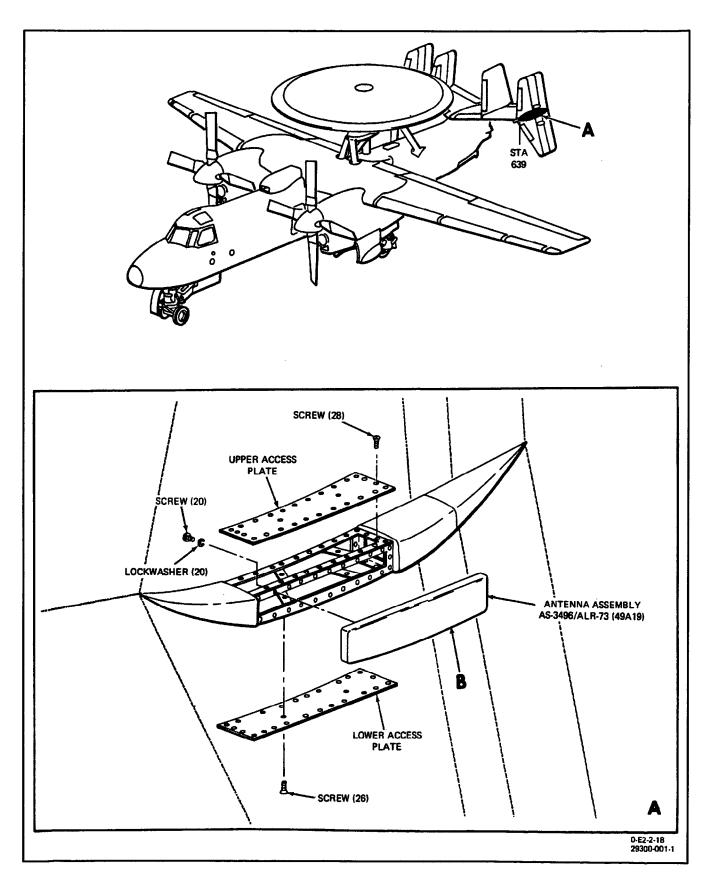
Removal and Installation of Antenna Assembly AS-3496/ALR-73 (Sheet 1 of 2)
